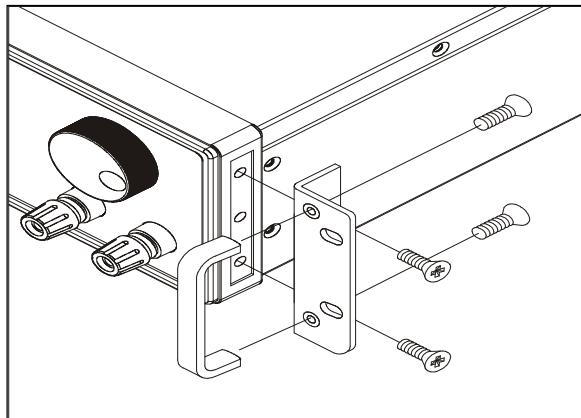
Installing the Rack Mounting Kit & Handle of 62006P, 62012P & 62024P
